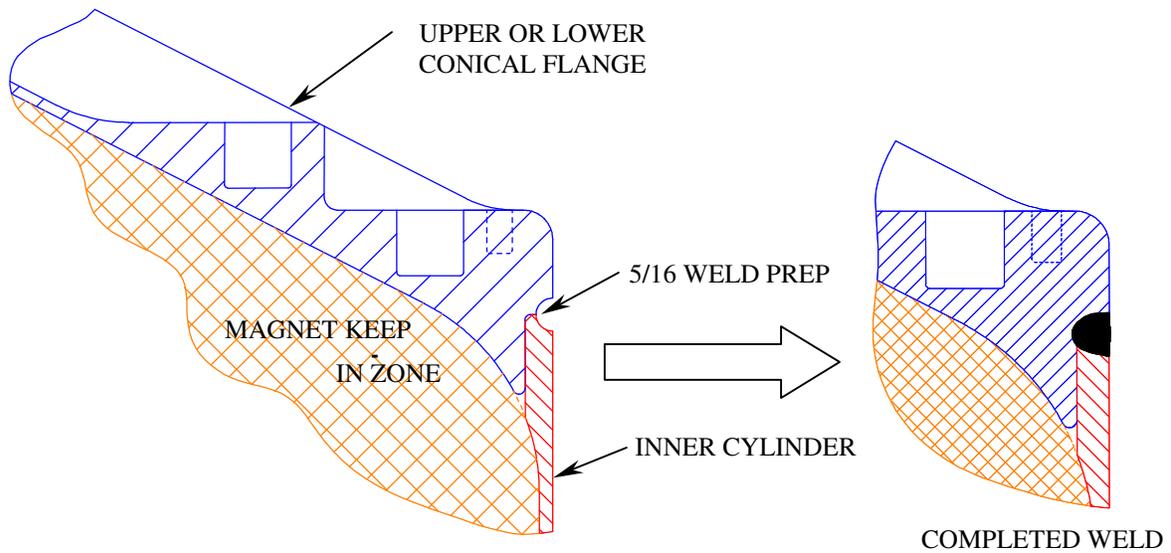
Inner Joint (Closeout Weld) Assembly Detail
